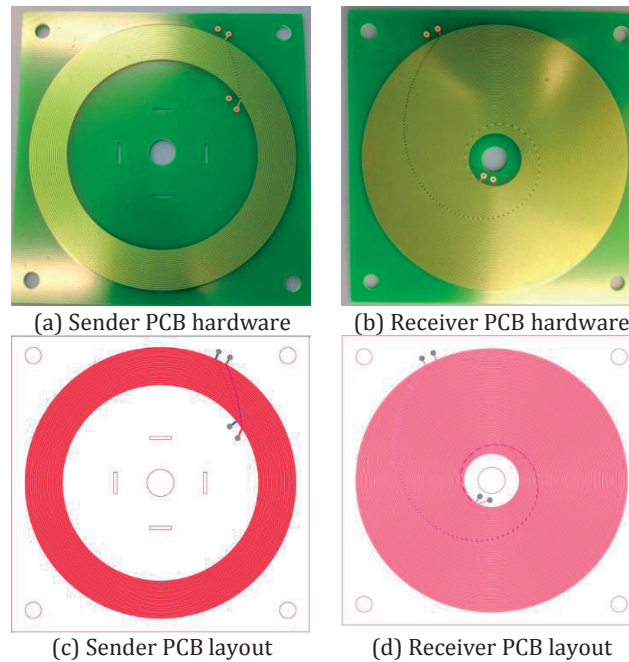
7 PCB hardware of the a) sender coil b) receiver coil with their PCB layout design done by Altium Designer c) and d).
